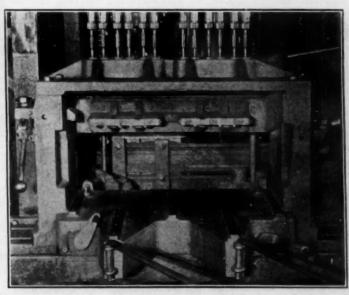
Line Reaming Fixture for Valve-Seat and Valve-Guide Holes Notice the Lower Row of Bushings To Take the Reamer Pilots
